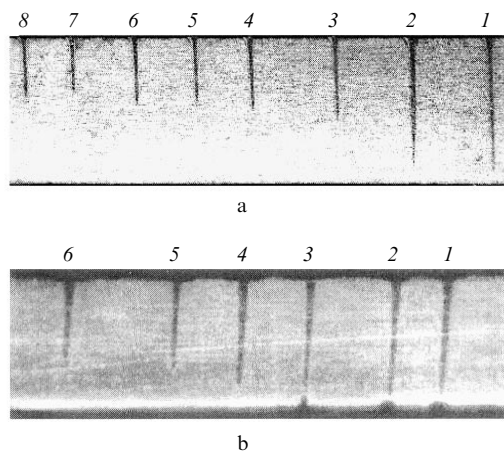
Photographs of the cross-sectional view of welds in a (a) 4.6-mm-thick AD16 aluminium alloy sample and (b) 3.2-mm-thick stainless-steel sample for $W = 8 \text{ W}$, $f = 33 \text{ Hz}$, and $V = 0.1$ (1), 0.2 (2), 0.3 (3), 0.4 (4), 0.5 (5), 0.6 (6), 0.8 (7) and 1 mm s^{-1} (8).
